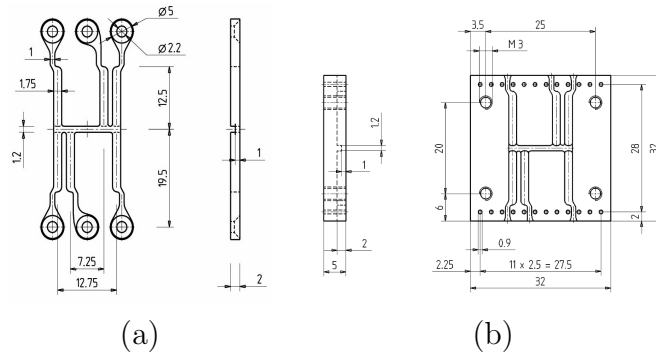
The H structure: a) the copper structure is manufactured out of one piece of oxygen free copper, using a spark erosion technique; it is manufactured in house. b) the Macor piece: it is made to fit the copper H structure, and so provide mechanical support to it. Note here that the copper H structure and the Macor piece are made together, which means, that only two selected pieces belong to each other. This is necessary to ensure the mechanical support.
